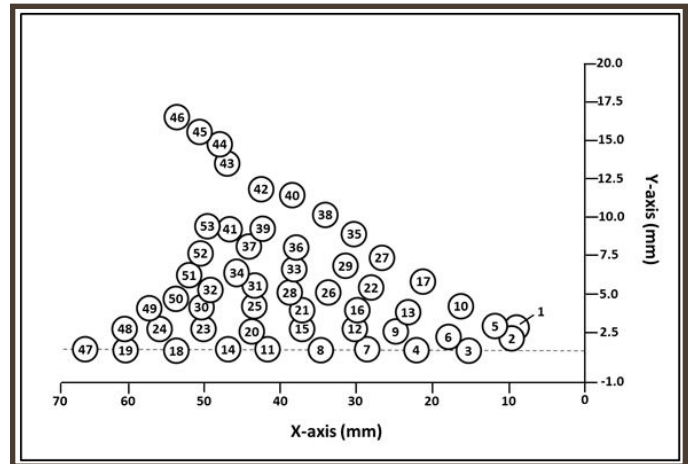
Weld path plan depicting the desired location of each weld bead in the joint
